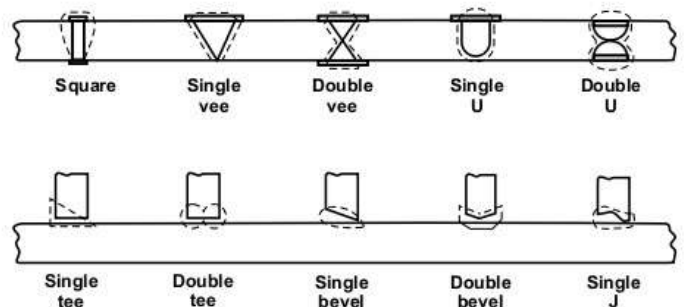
Different types of butt (groove) welds
